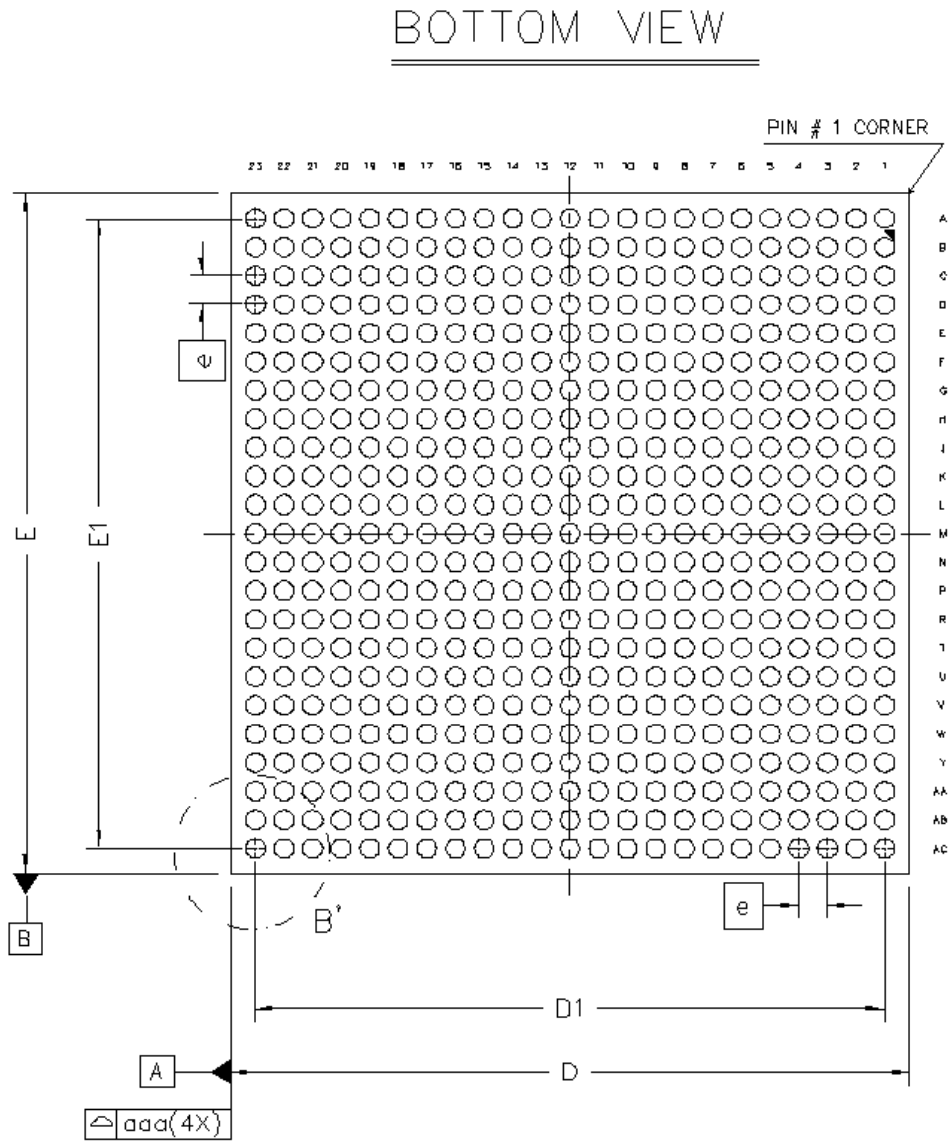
529-pin 19 mm x 19 mm HFCBGA Bottom View of the 88E2180 Device
